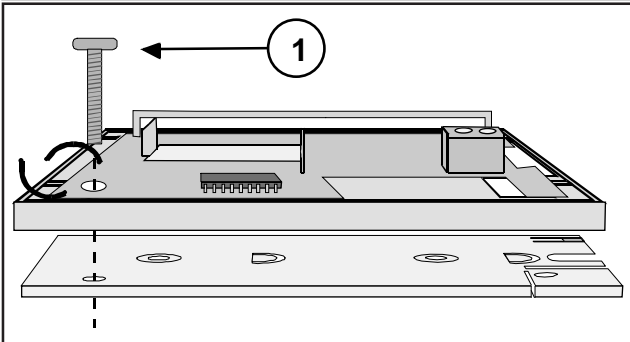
Slide the Point Transmitter onto the Mounting Plate
